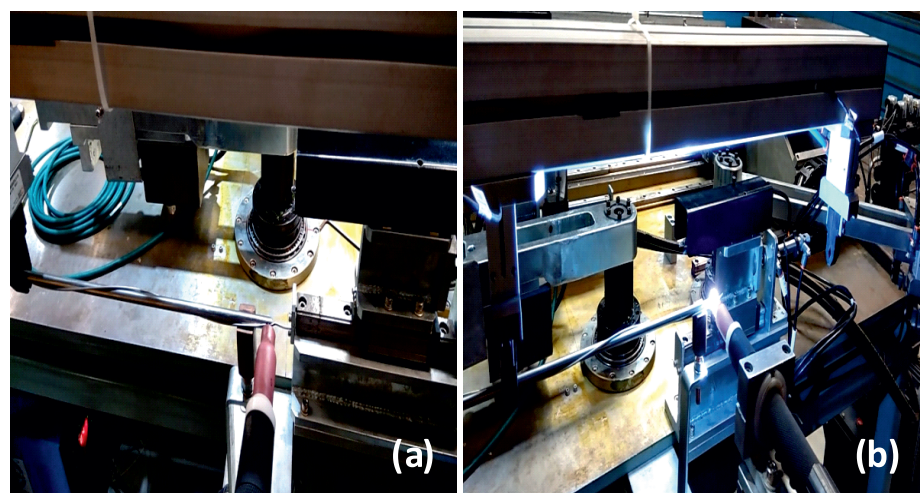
(a) Camera guided electrode positioning system for welding operation and (b) Welding operation in progress
